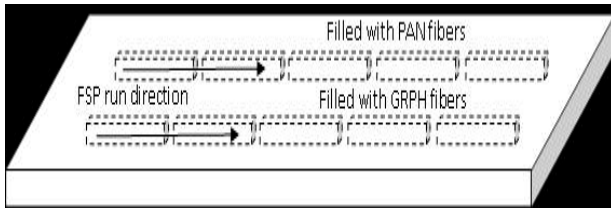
Schematic drawing of the technique used for reinforcing aluminum plate with carbon fiber
